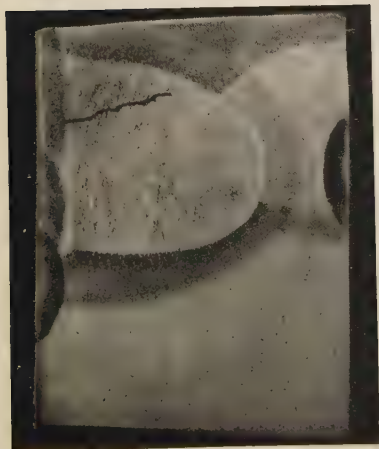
Section through Weld shown in Fig. 23, showing crack. (Actual size.)
